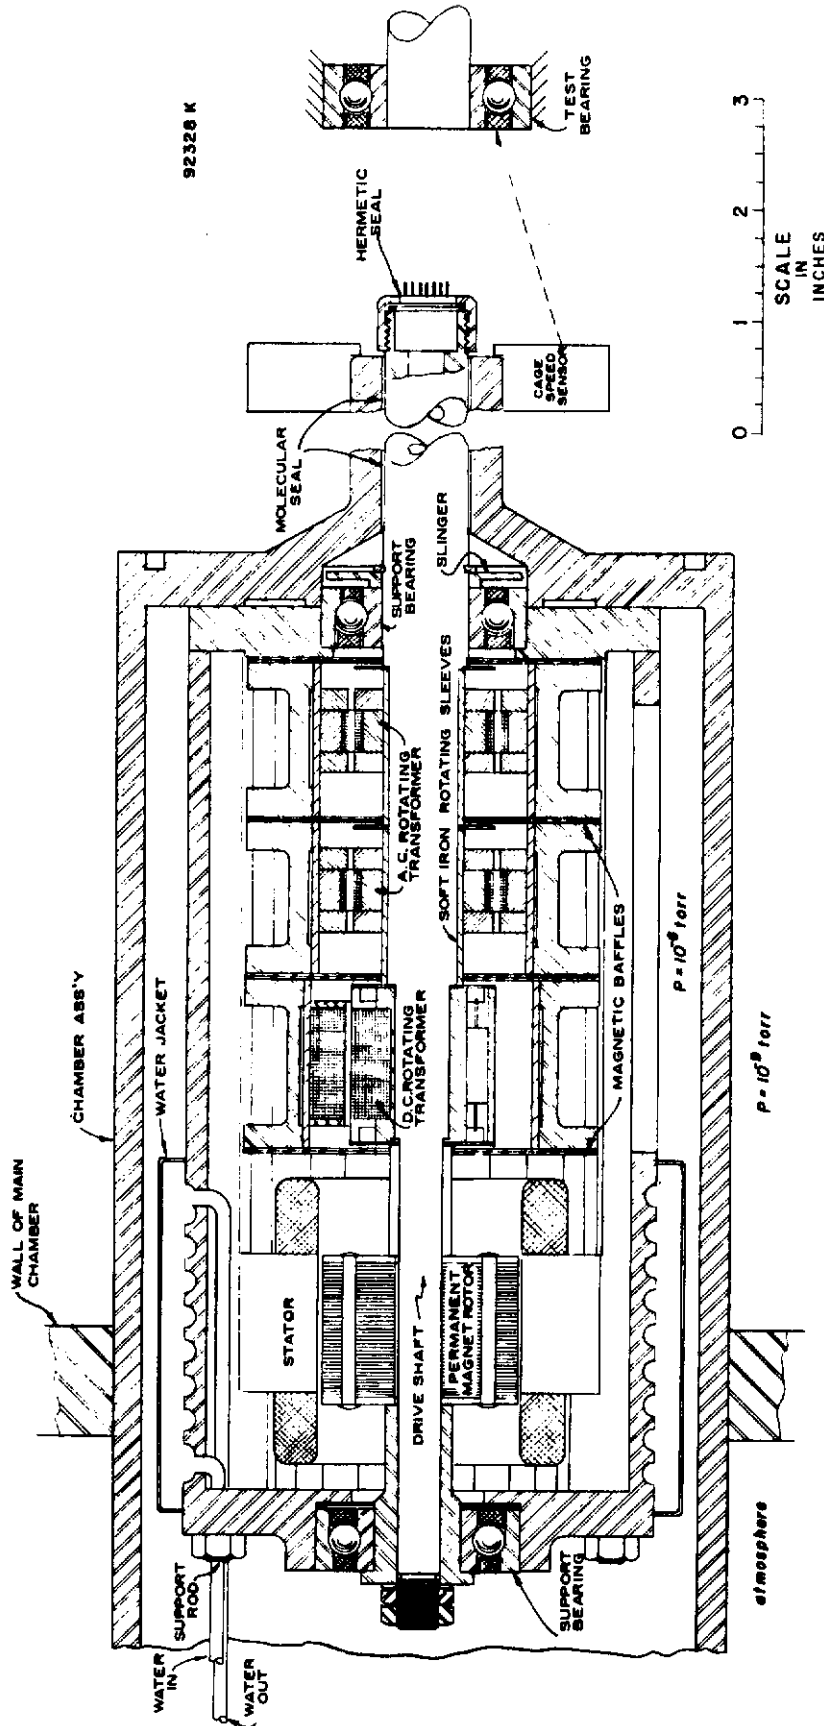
CAGE FOLLOWER DRIVE SHAFT WITH
